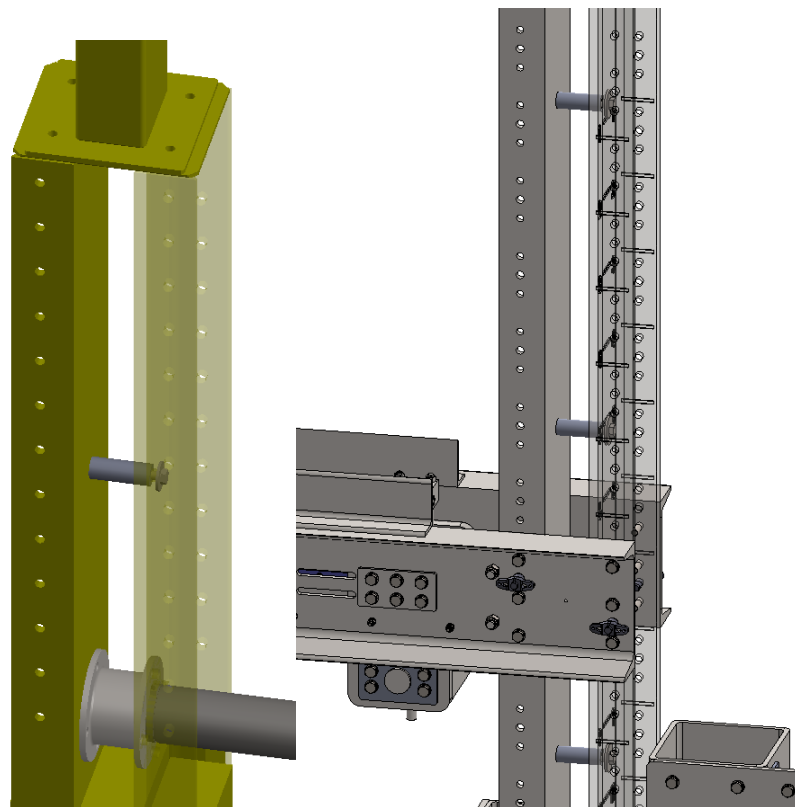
Shafts connecting the two UPN profiles of the column
